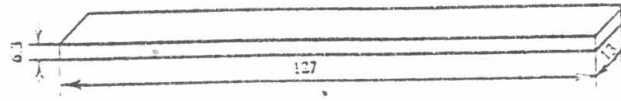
Dimensions of the Composite Extruded Specimen (mm)
